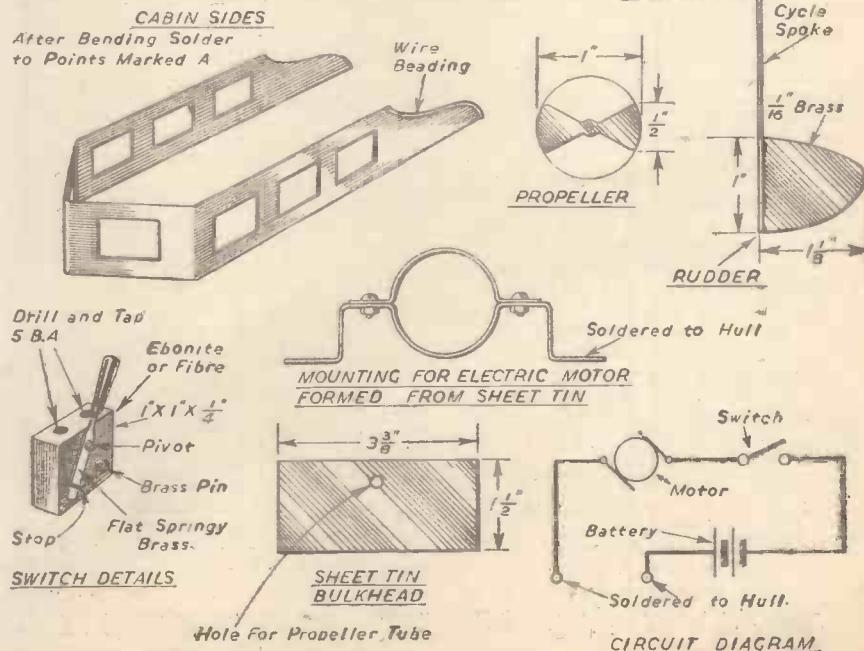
Details of the cabin sides, propeller, rudder, switch, and the circuit diagram.
